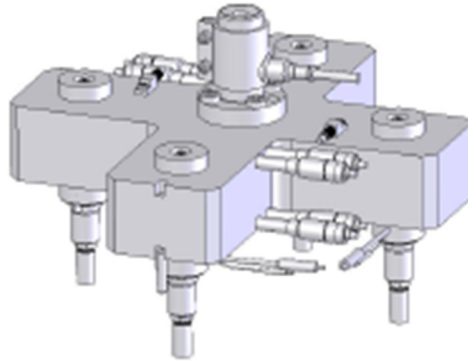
Hot runner system assembly (DS, Standard Components, 2008)
